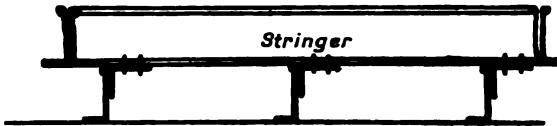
Bulb Angle Frames with large Lug for Stringer Connection.
